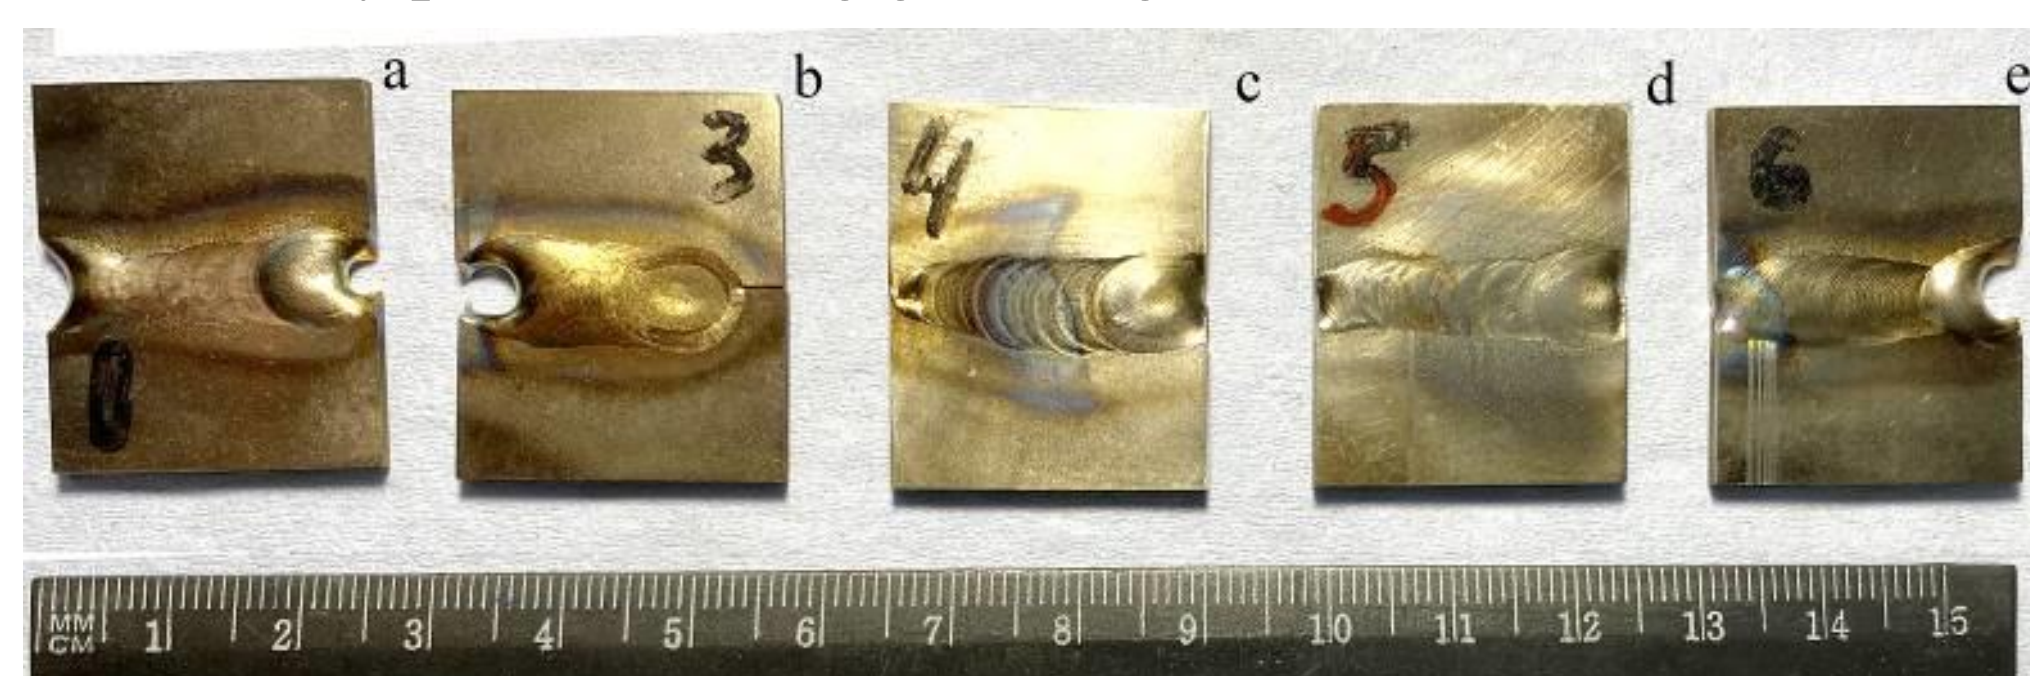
Appearance of welds obtained by GTAW at different modes: (a) No.1; (b) No.3; (c) No.4; (d) No.5; (e) No.6
